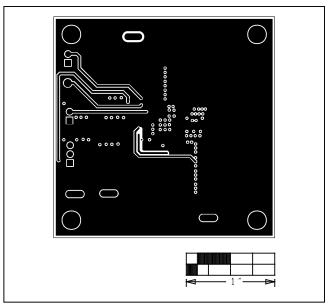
MAXM17545 EV Kit PCB Layout—PGND Layer 3
